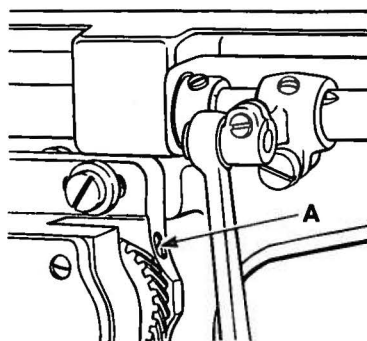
Sewing Hook Oil Control Valve Set Screw
